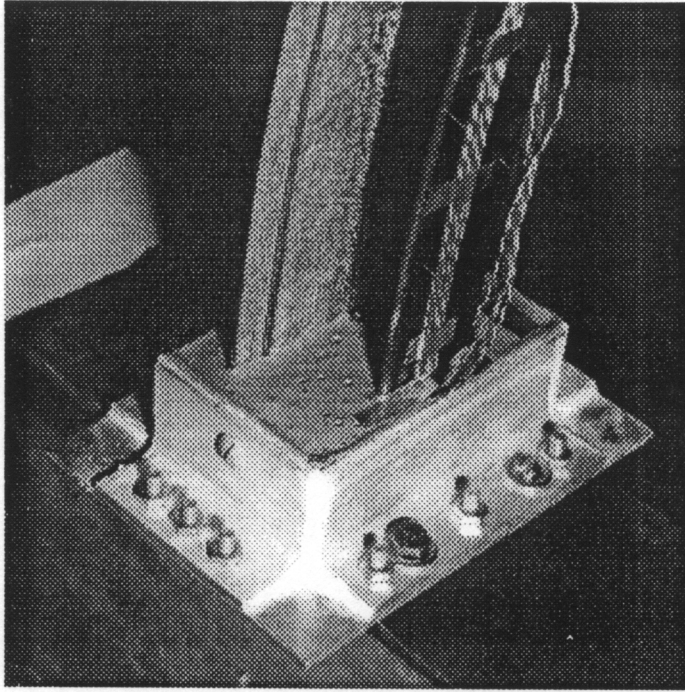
Frame Clamping Fixture—Aluminum Housing
